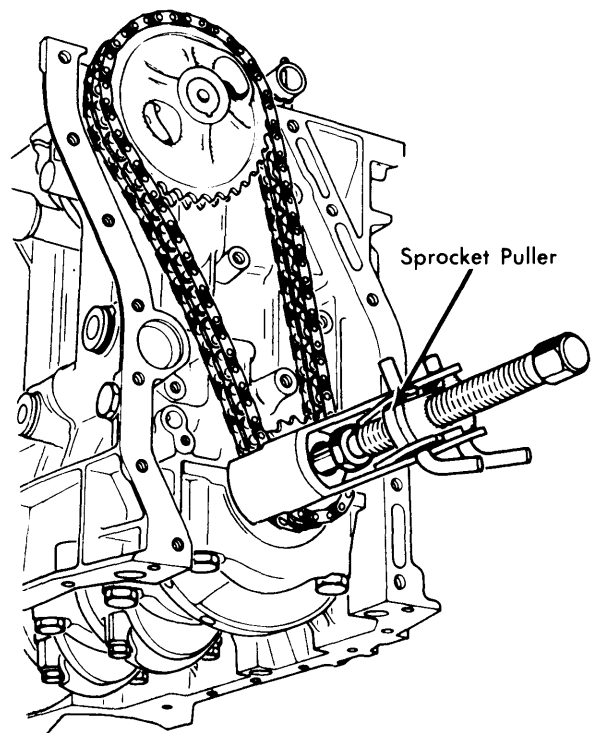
Using Puller to Remove Crankshaft Sprocket
